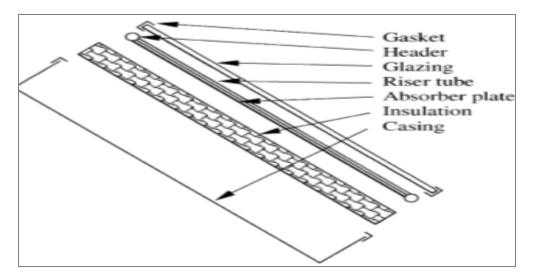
exploded view of a flat-plate collector* [5].
